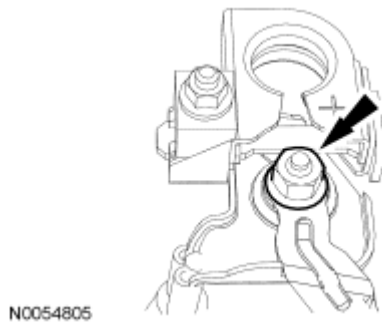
Locating Power Feed To Battery Terminal And Nut
